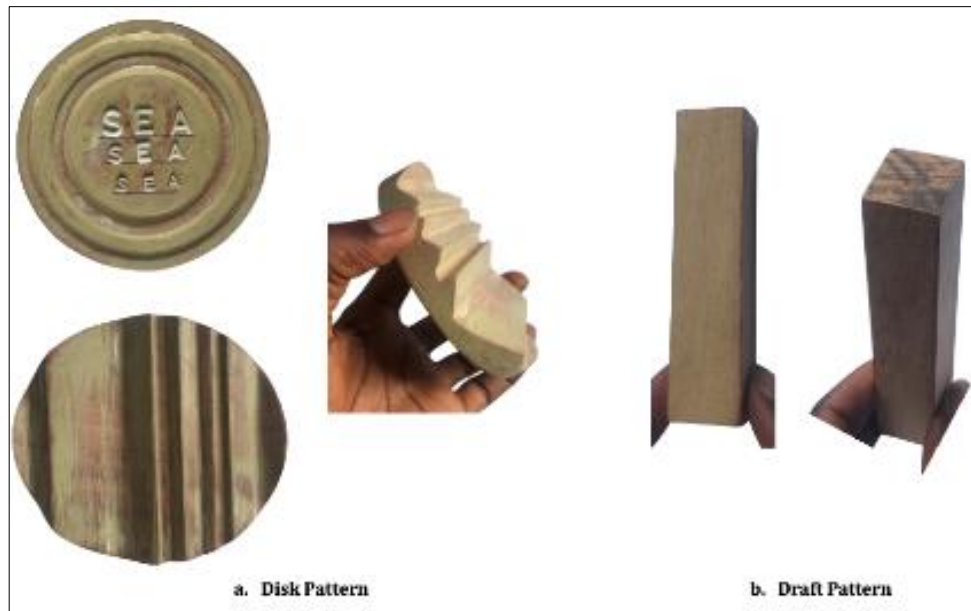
Conventionally Fabricated Pattern. (a) Disk Pattern. (b) Draft Pattern
